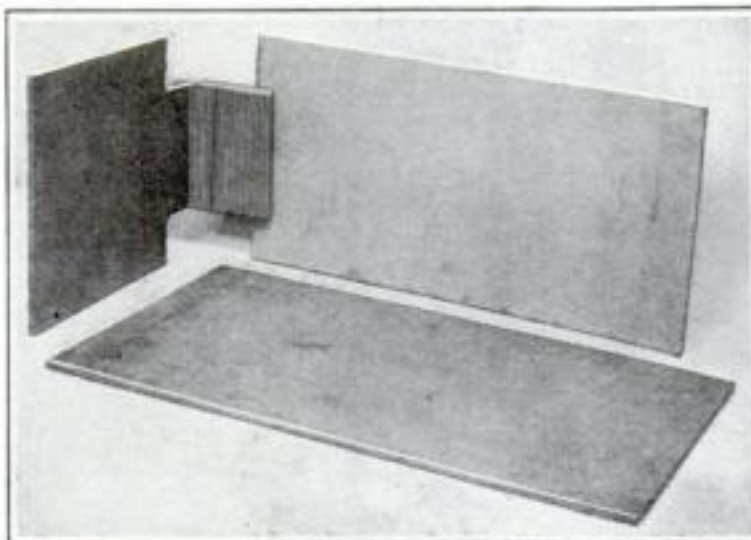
The templates used in soldering. Note how the side and end templates are notched and held together by a block of wood.
